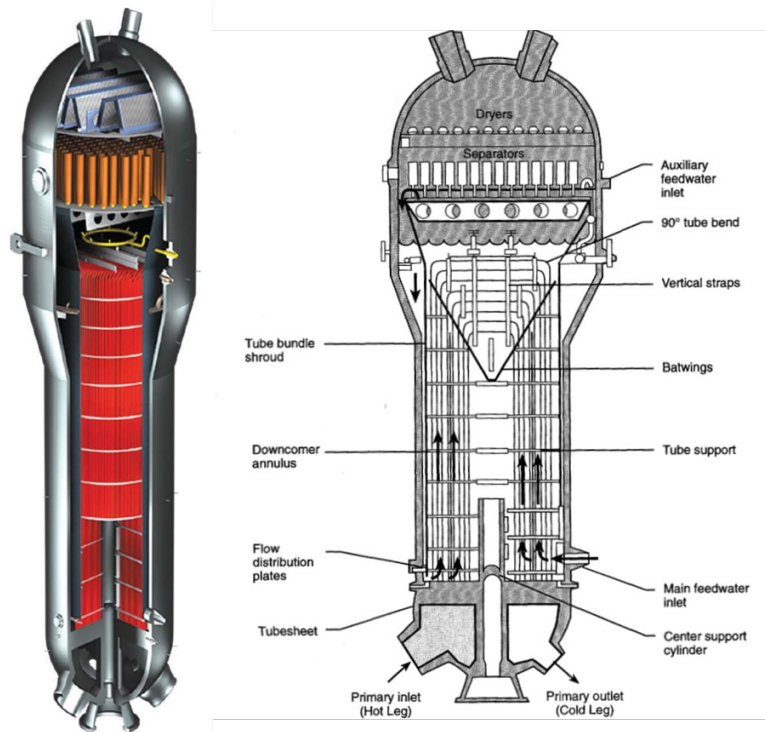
Schematic drawing showing internal details of the APR1400 steam generator [1]
